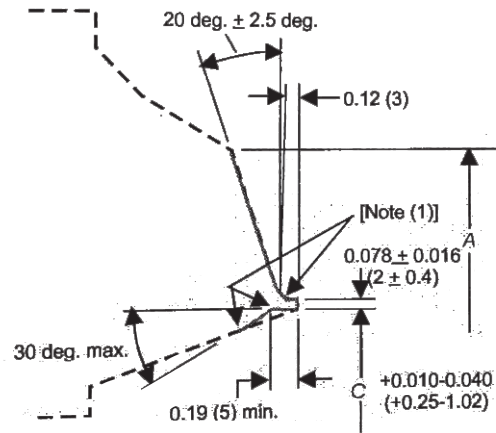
FIG III WELD BEVEL DETAILS FOR GTAW ROOT PASS
